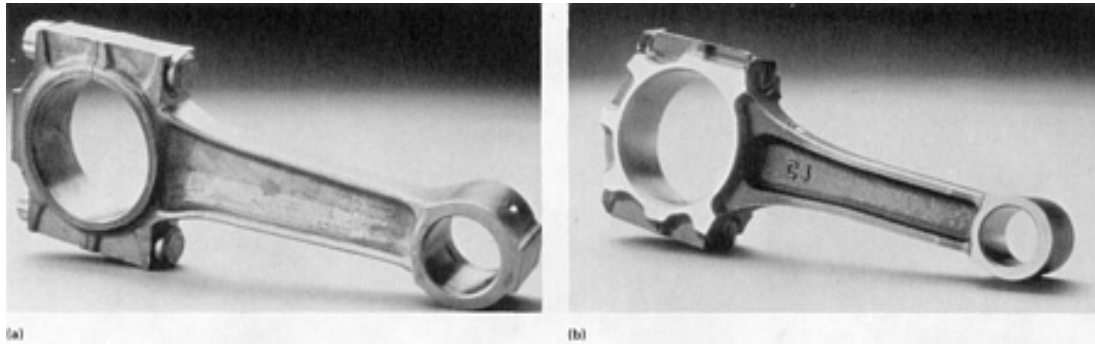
Powder forged connecting rods. (a) Rod for Porsche 928 V-8 engine. Note reduced size of balance pads. Courtesy of Powder Forging Division, GKN Forgings. (b) Rod for Toyota 1.9 L engine; balance pads are completely eliminated.
